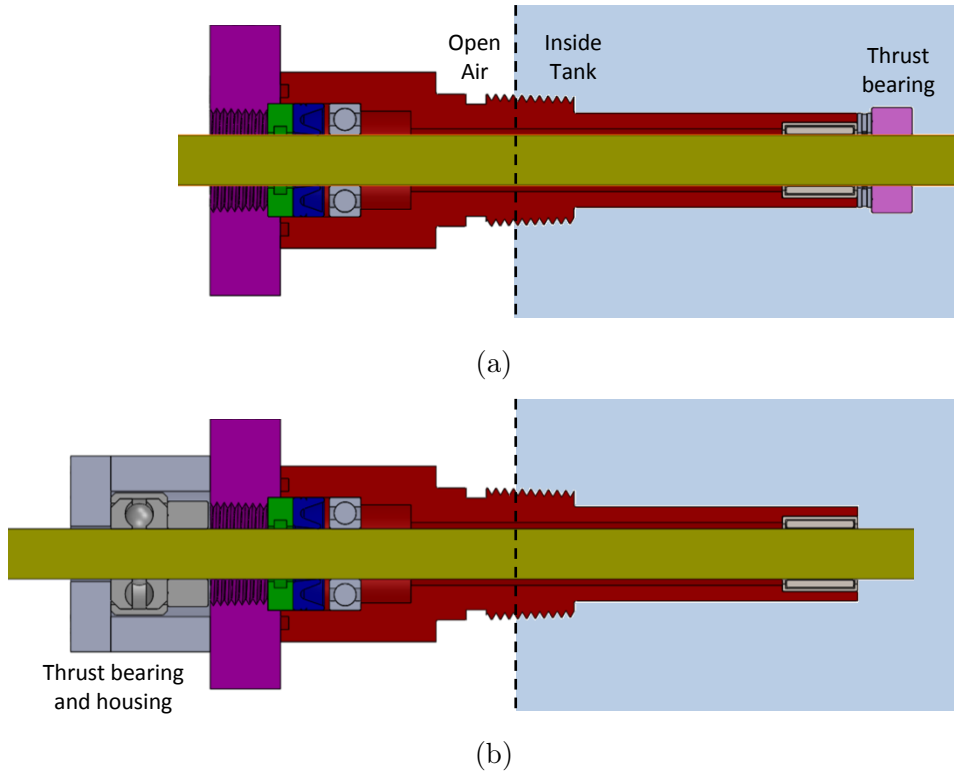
Comparison between old thrust bearing mounted inside tank (a), and new thrust bearing placement in an external oil bath (b) designed to alleviate seizing issues
